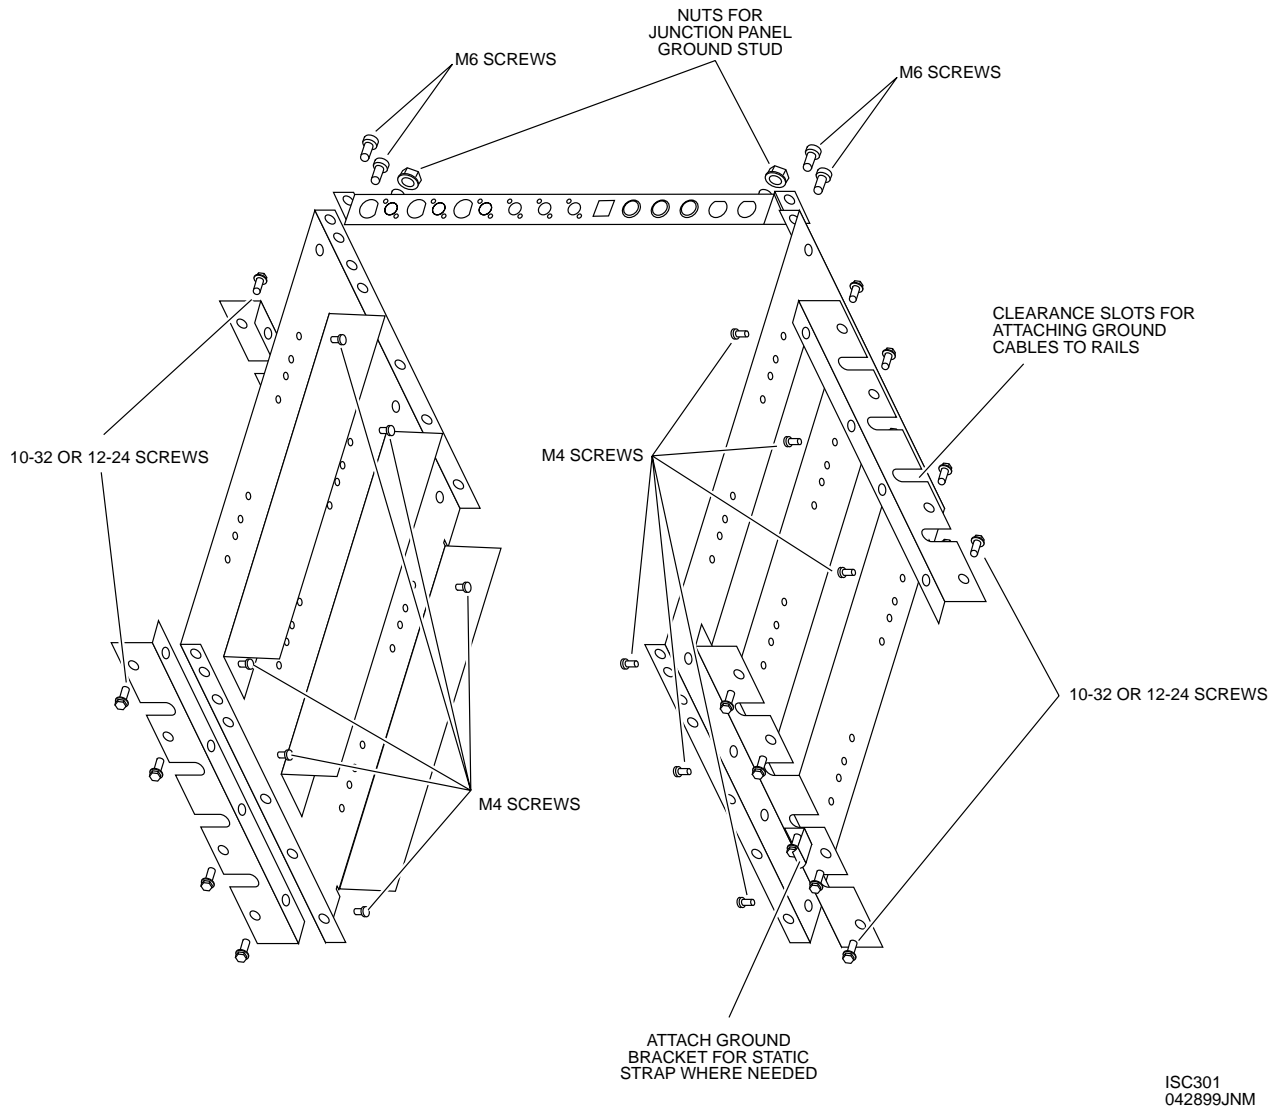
Assembly for mounting in a Power Supply cabinet
